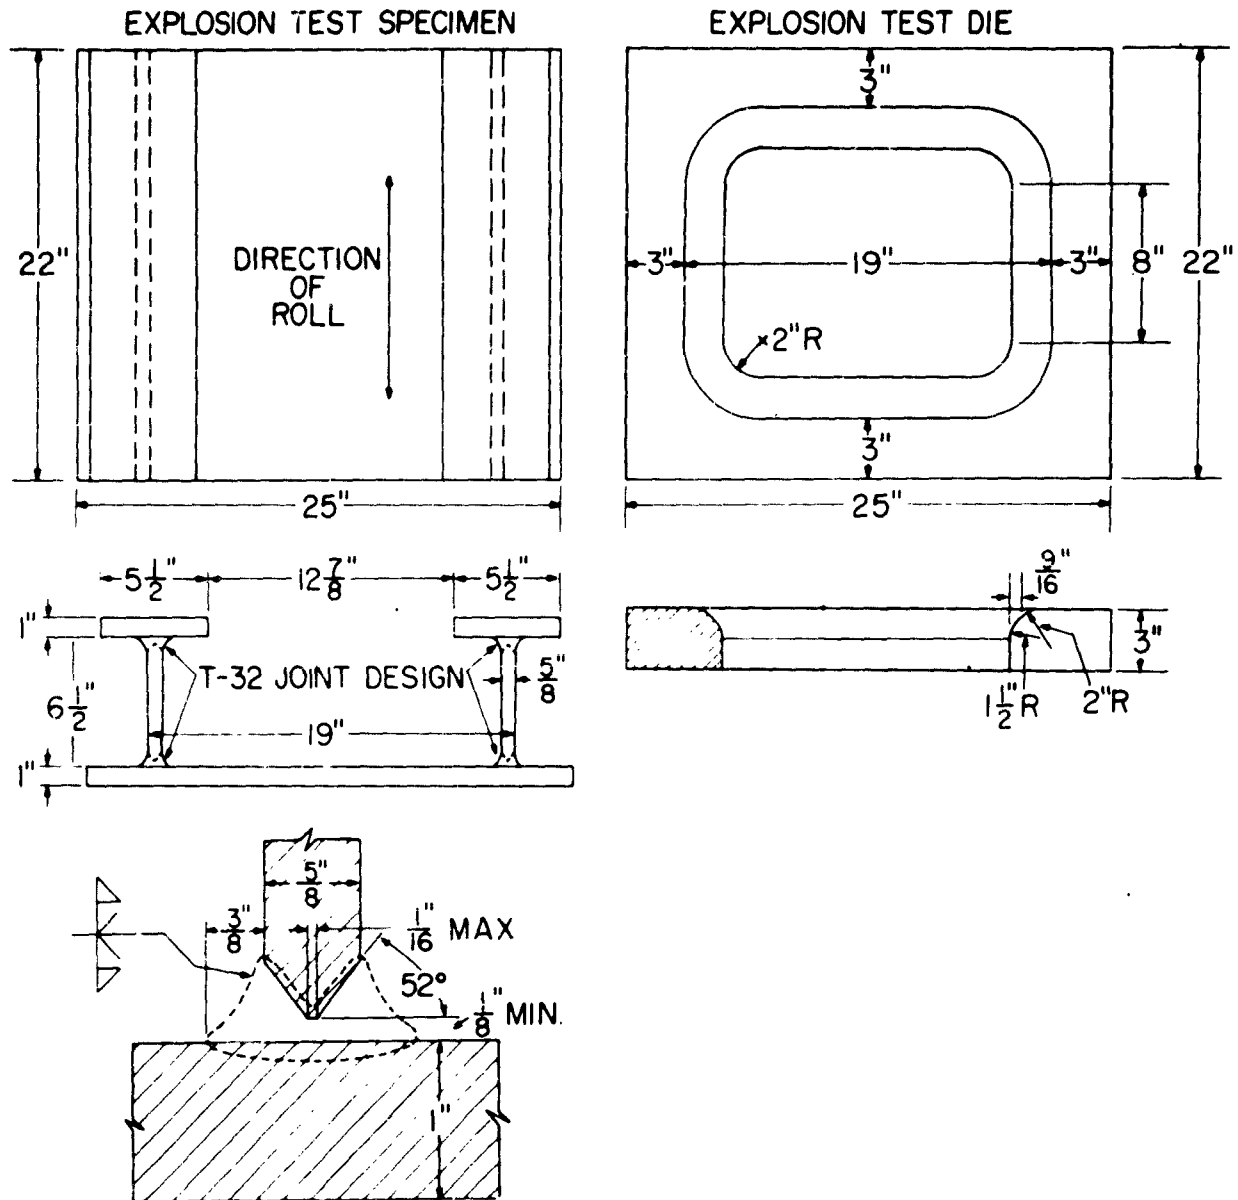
Simulated structural component used as explosion test specimens and weld joint design (left); configuration of explosion test die (right)
